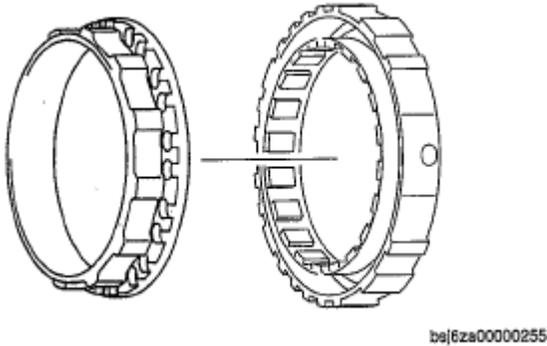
Identifying B3 Brake Piston On B3 Brake Cylinder
